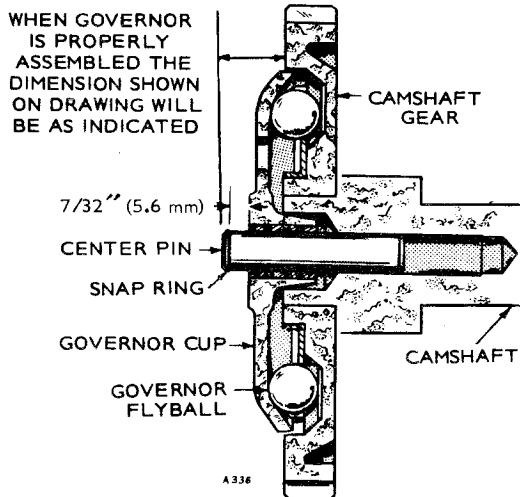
GOVERNOR CUP (CROSS SECTIONAL VIEW)
